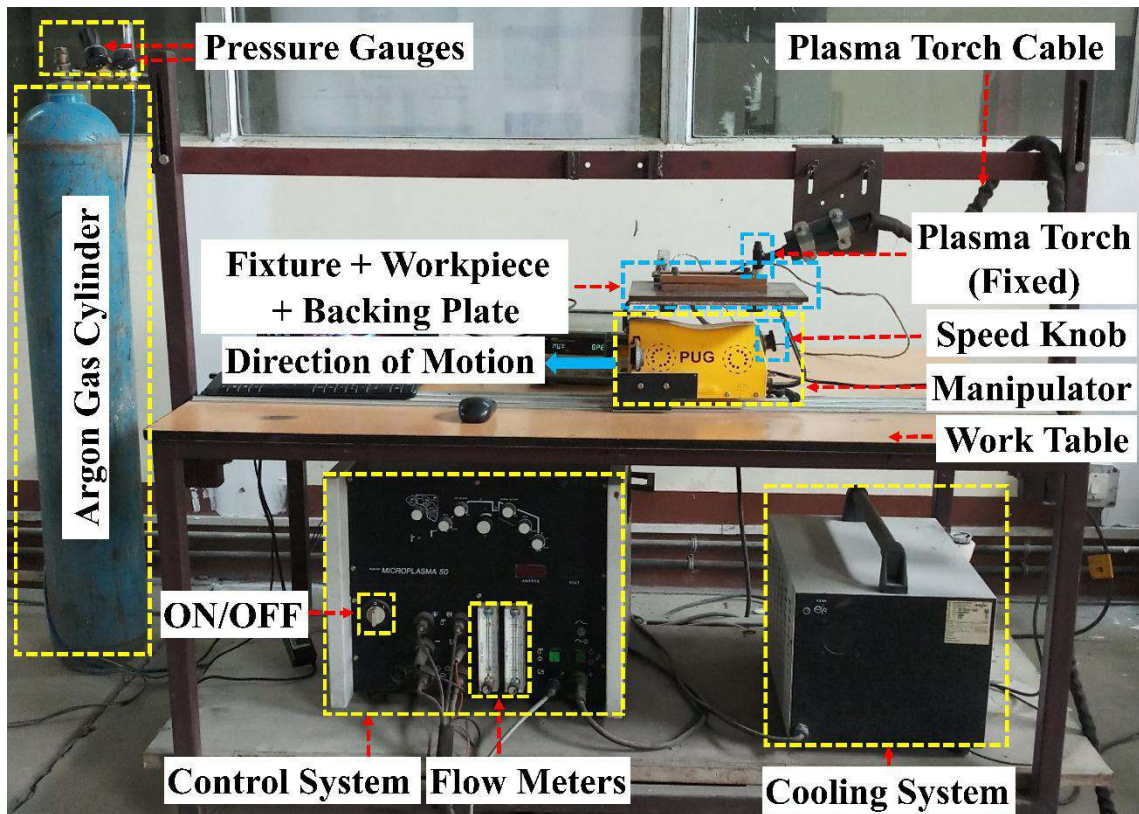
Experimental layout employed for micro-plasma arc welding of thin sheets.
